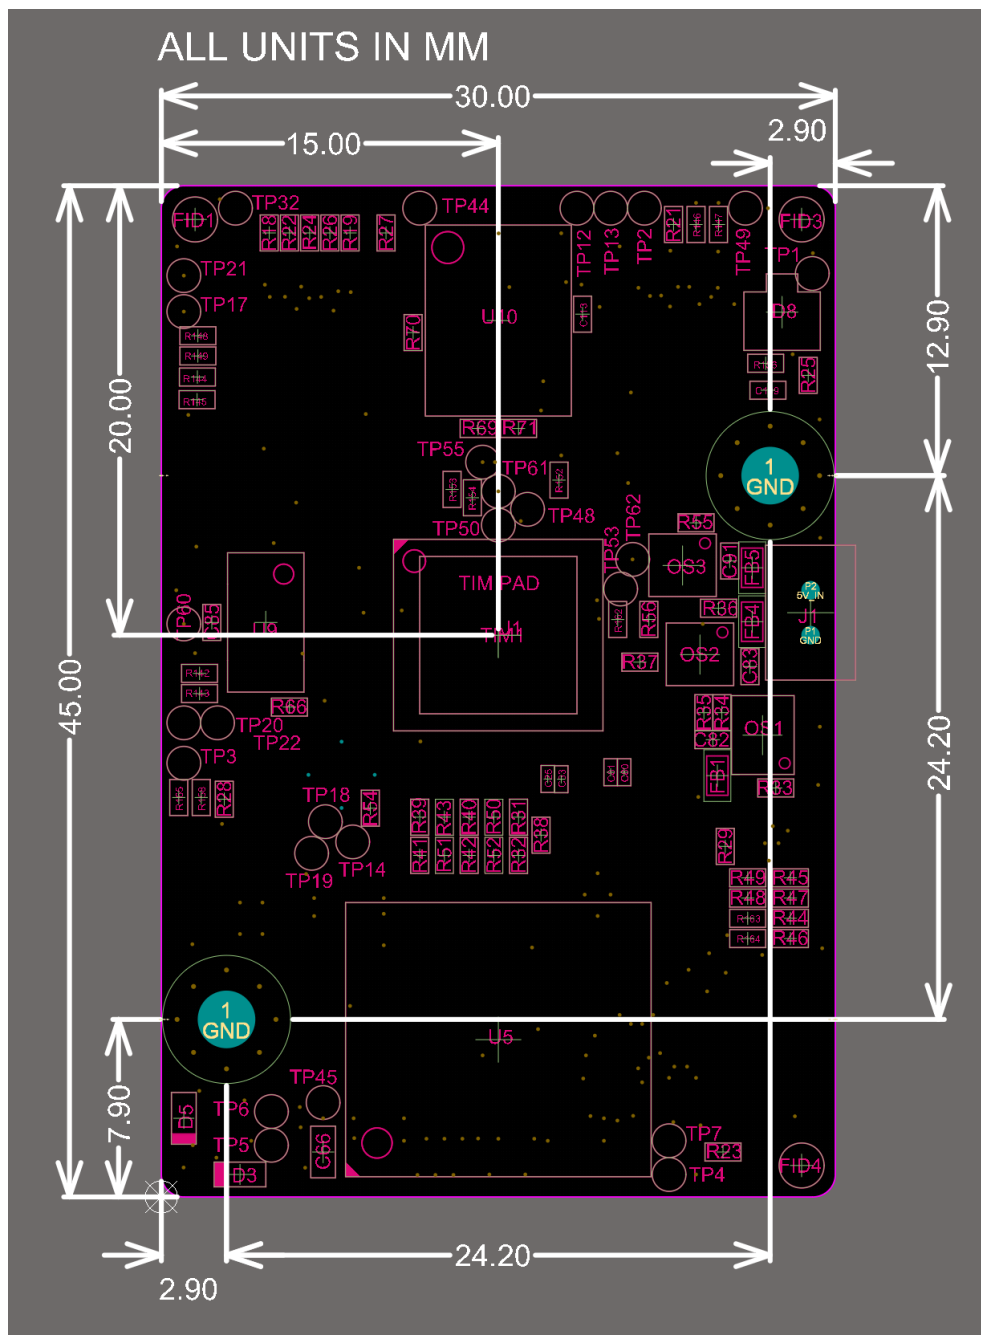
BW2099_ROM0E0 Top View Dimensions
